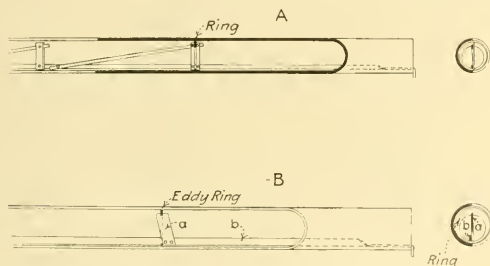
EDDY RINGS FOR MARINE BOILER TUBES
